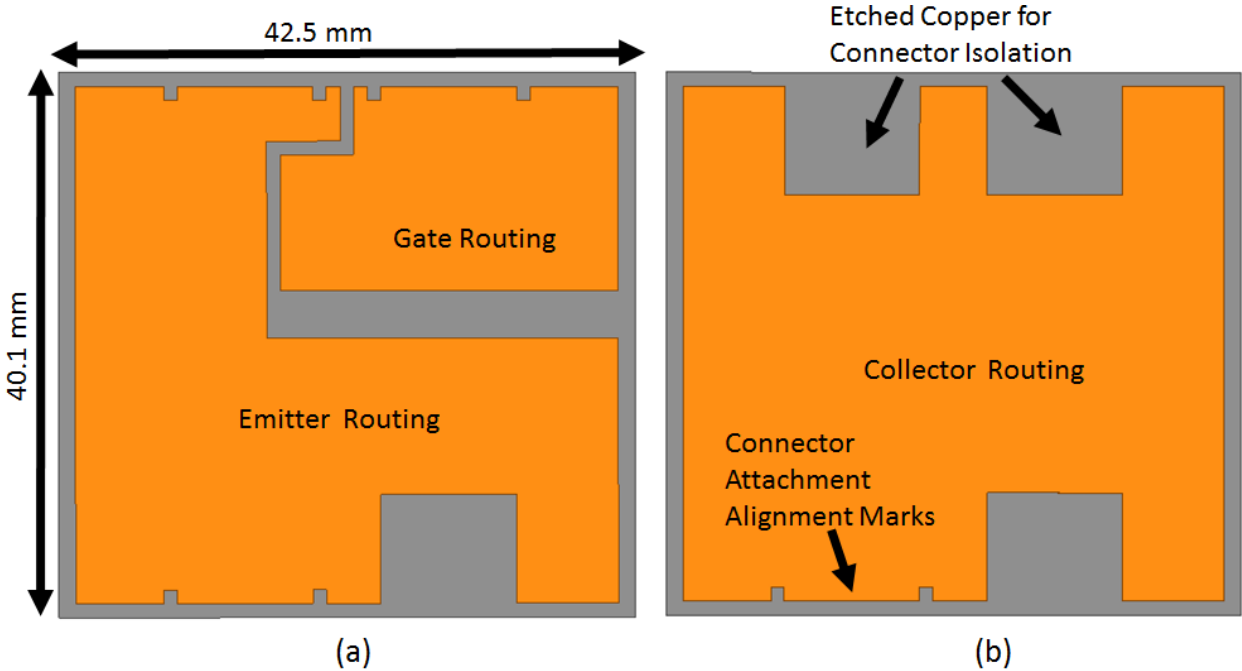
(a) Layout of bottom DBC (b) layout of top DBC
